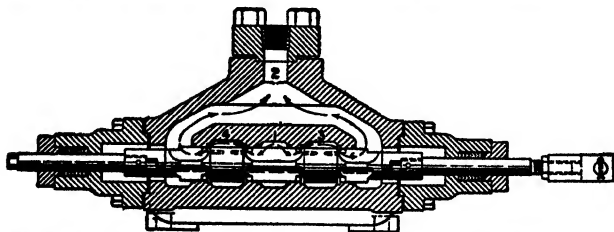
Sectional view of a four-way by-pass valve shown in Fig. 15-14. In this view, the valve is in a neutral position and the oil is by-passing from port (1) to port (2).
